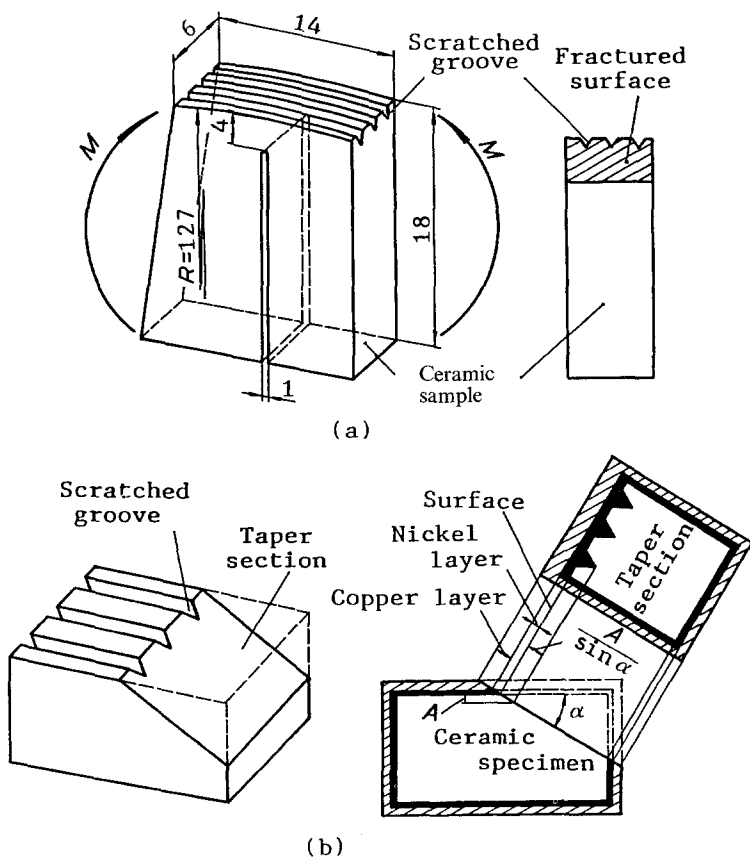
Schematic drawing for illustrating the fracture method and the taper polishing method. Dimensions in millimetres.
